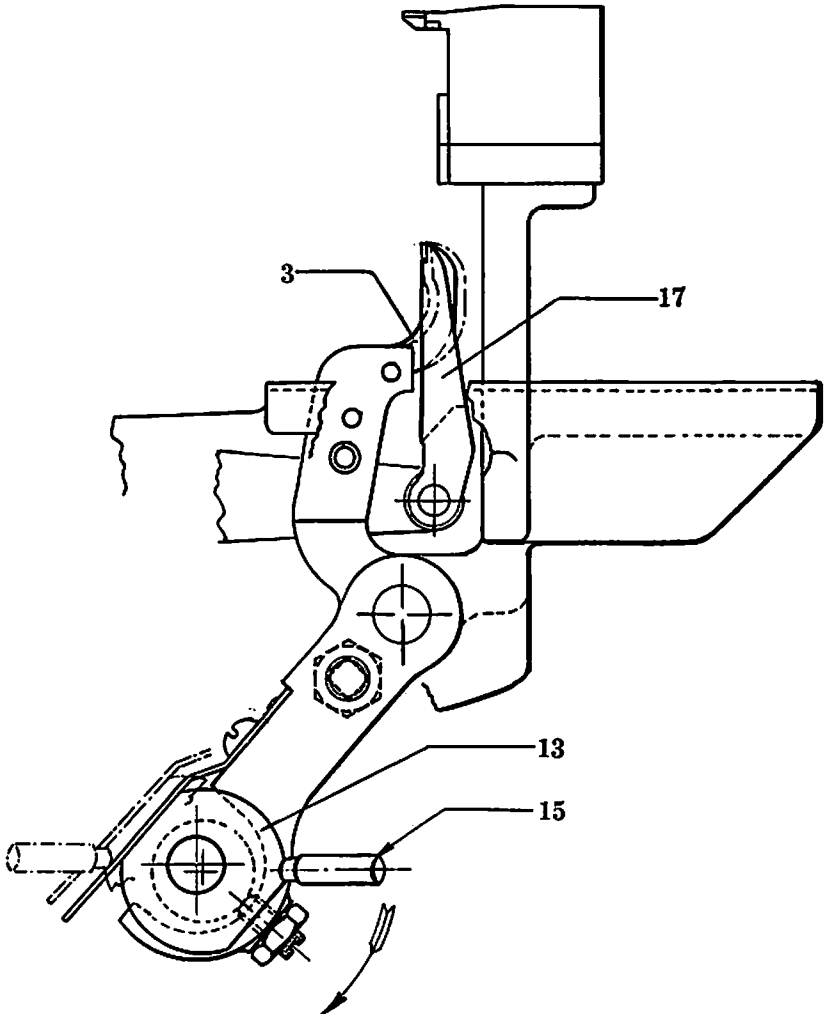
Detail View of the Front Font Selector Arm, showing the eccentric bushing 13 provided for moving the front font selector feeler 3 forward to an inoperative position. This device is used when a font of matrices from a single distributor machine is to be run on a mixer machine. Such matrices, of course, do not have the mixer selector notch ordinarily required in matrices running in the mixer machine, so provision is made to render the front selector feeler inoperative. The conditions under which single distributor matrices may be run on a mixer machine are described in the text.
